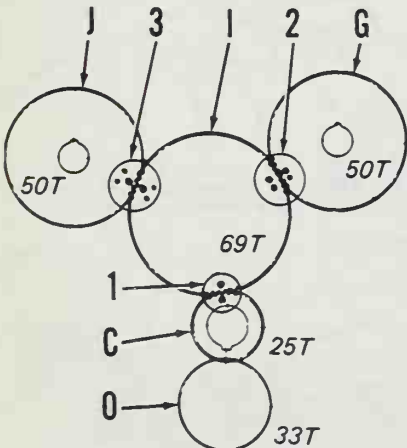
Diagram of drive gears showing proper alignment of timing marks. Note three marks (3) on injection pump gear (J) and idler gear (I); two marks (2) on camshaft gear (G) and idler gear (I); single marks on crankshaft gear (C) and idler gear (I). No marks are used on oil pump gear (O).
